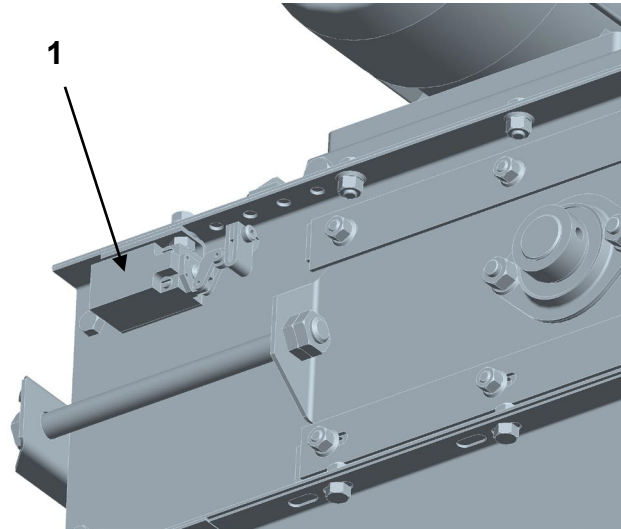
shows how a SØBY chain conveyor must be supported when mounting bracing supports.
